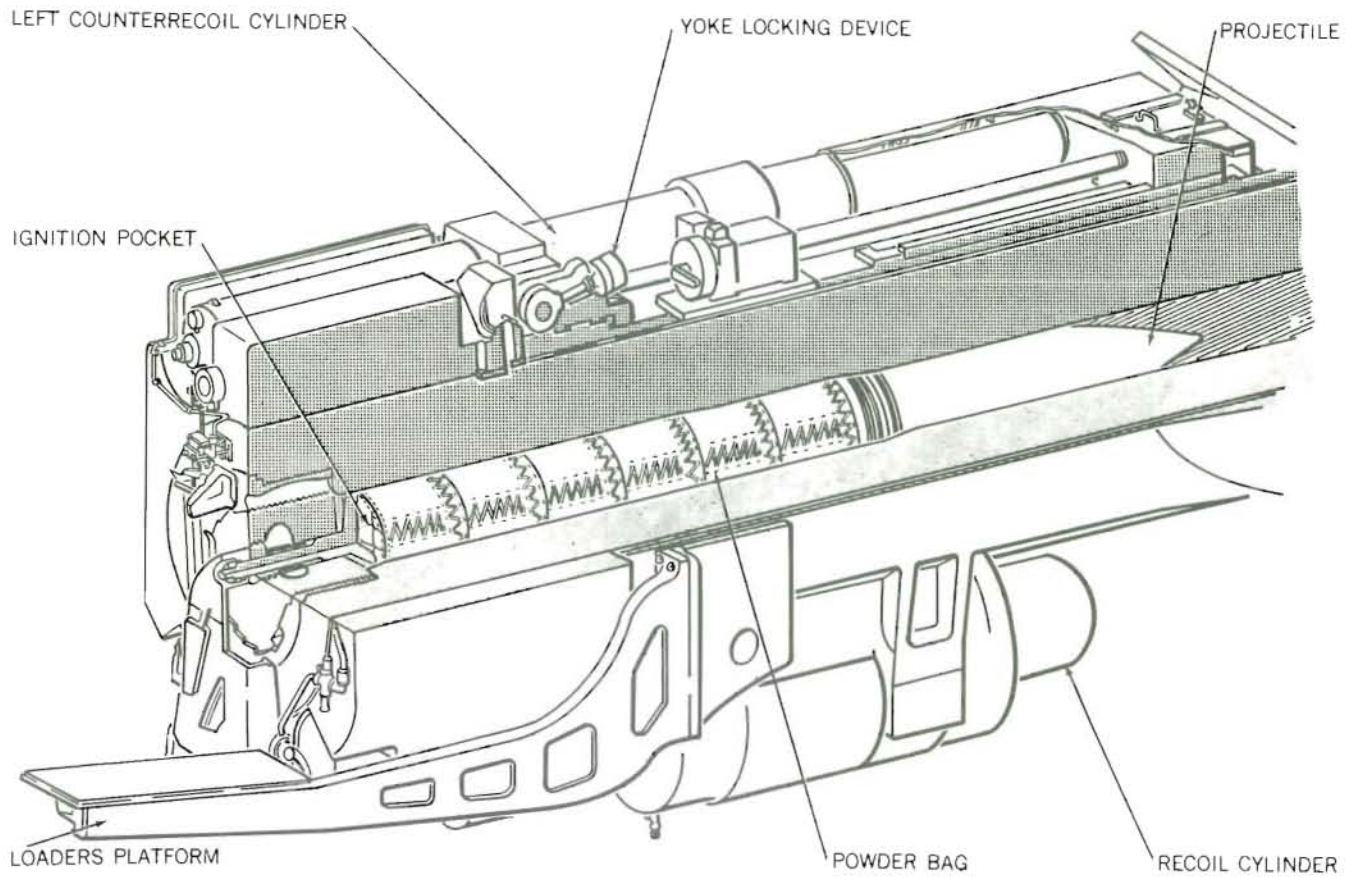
16-inch Gun Assemblies. Gun Ready for Firing.
